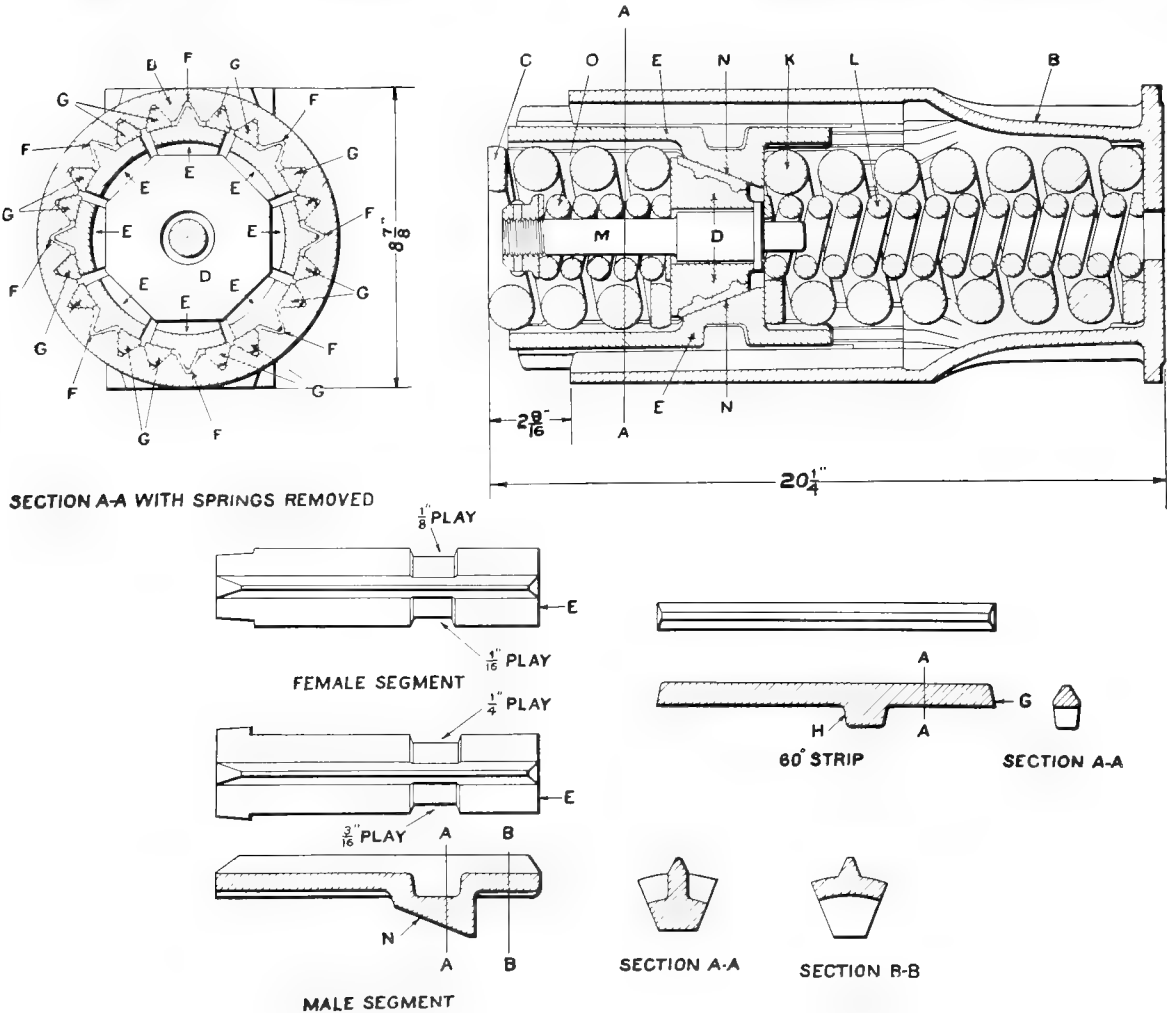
Section Through Westinghouse Friction Draft Gear, Type D-3. Westinghouse Air Brake Company.
